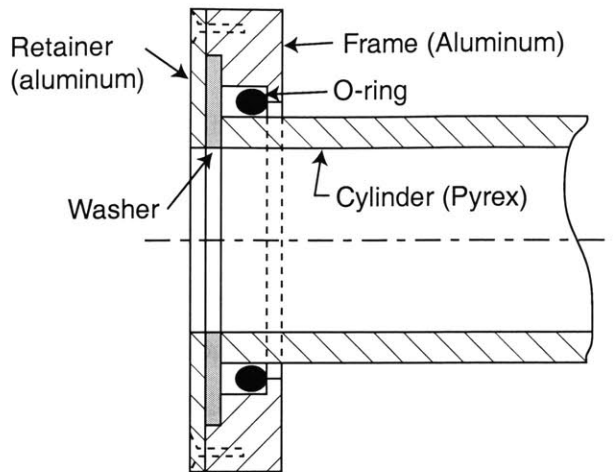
Cross-sectional drawing of static seal at cylinder end. An O-ring seals the cylinder end and provides radial cushioning. A washer provides axial cushioning.
